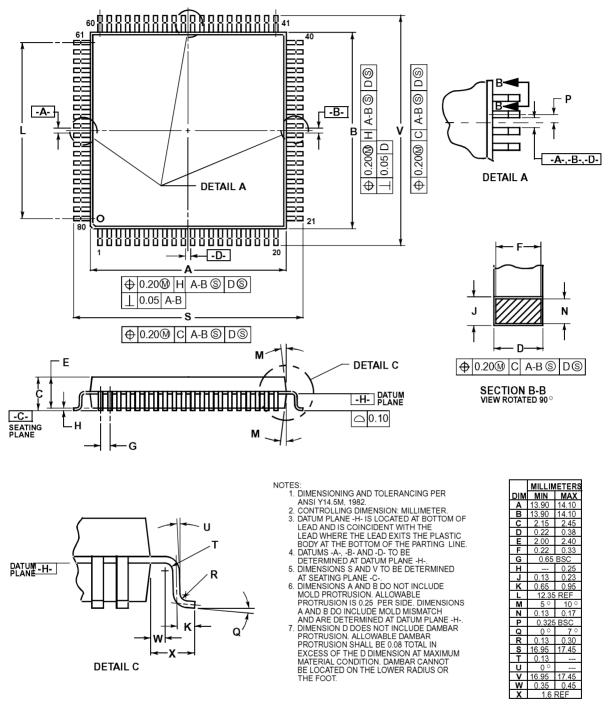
80-pin QFP Mechanical Dimensions (case no. 841B)
